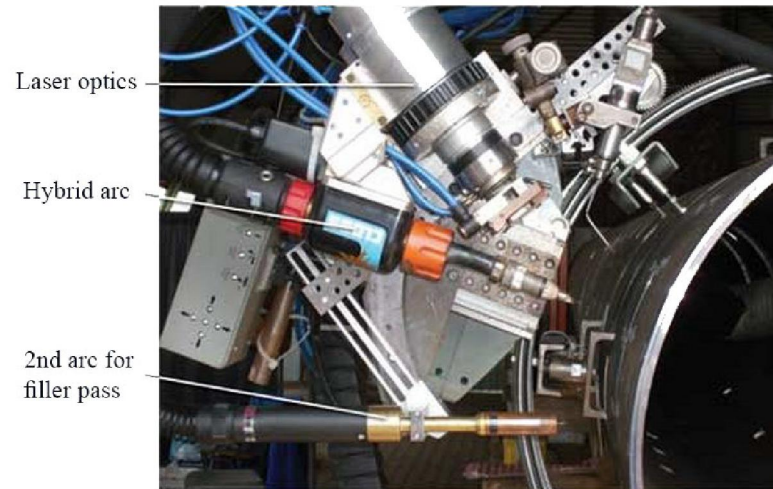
Welding head with hybrid equipment for root pass welding and arc torch for filler pass welding [180]
